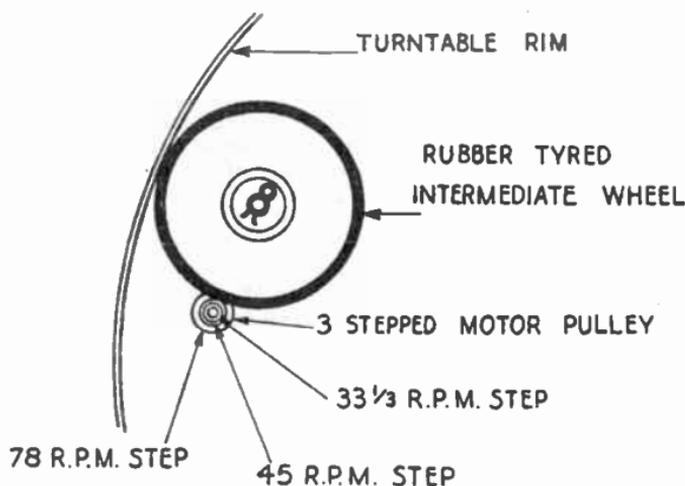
THREE-SPEED DRIVE USING STEPPED MOTOR PULLEY.
